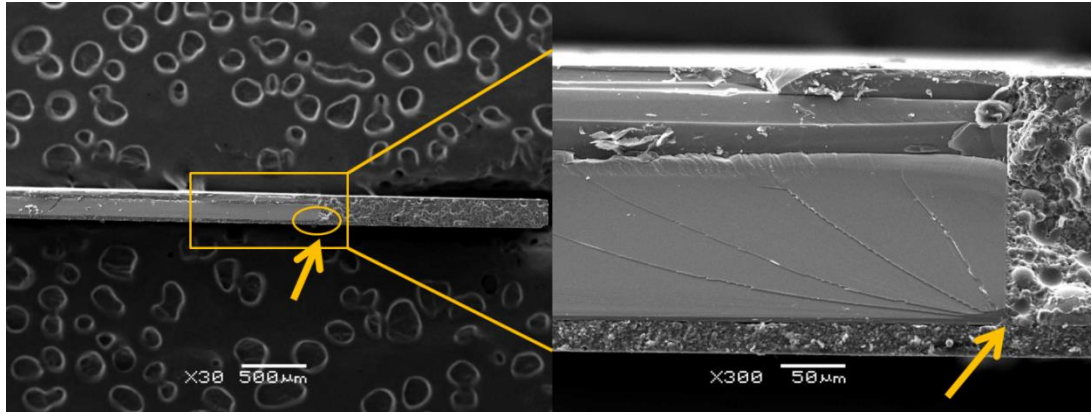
The initial fracture point appears on the silicon die edge of specimen A-3.
